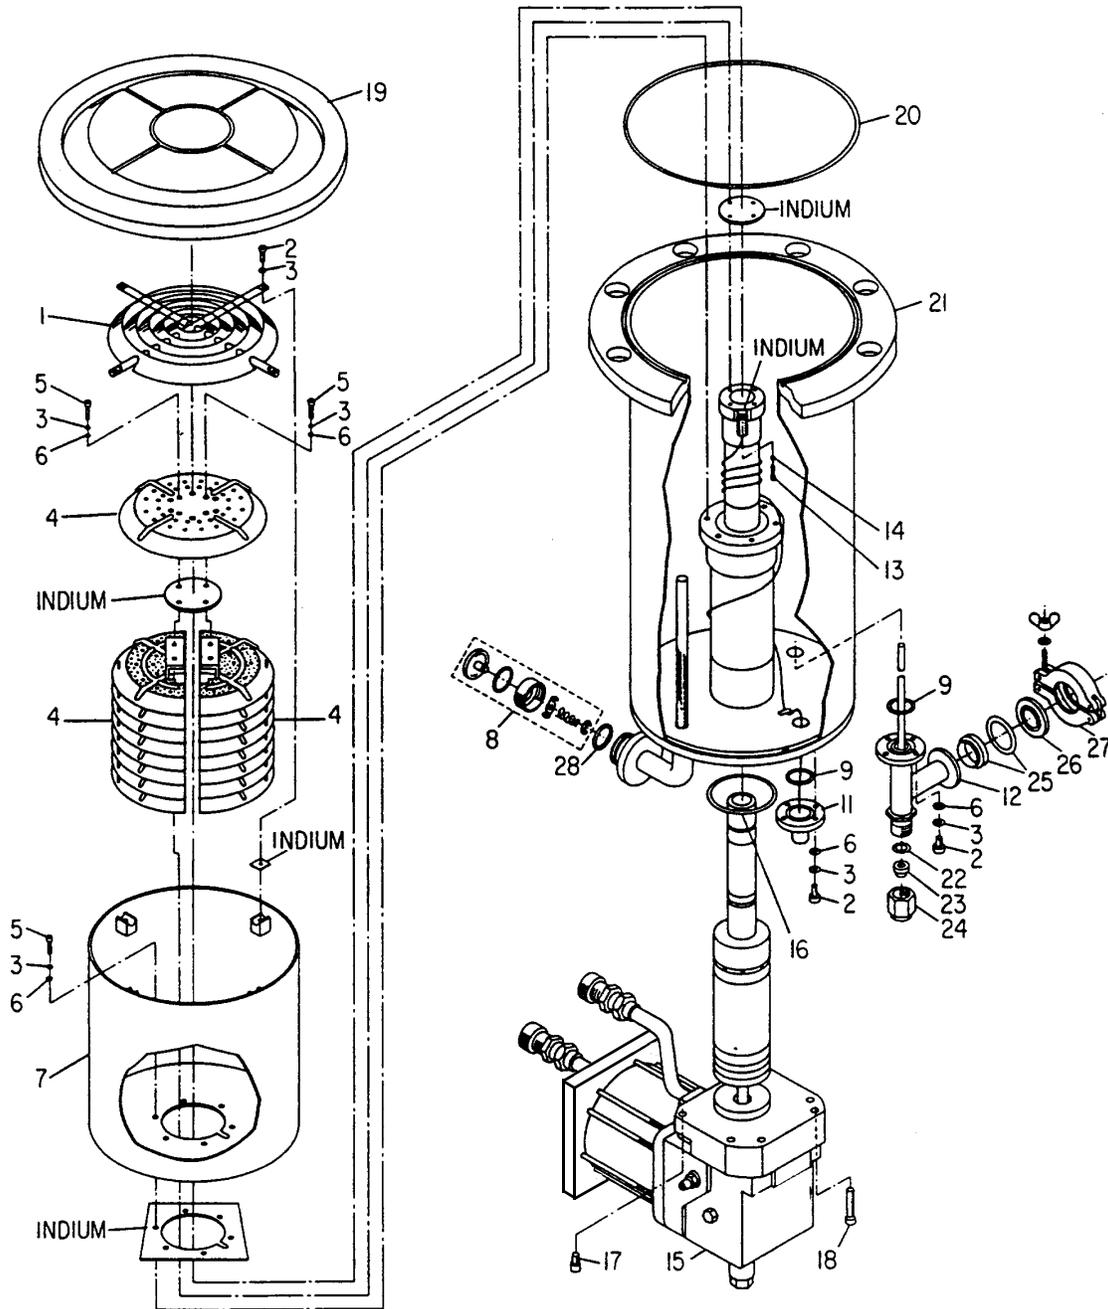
Exploded View of Cryo-Torr 7 Cryopump
